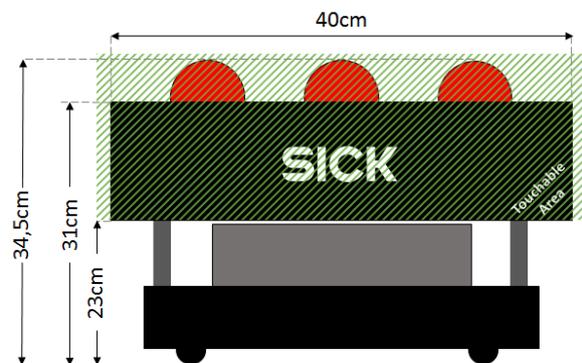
Dimensions of the transporter. All measurements have a tolerance of $\pm 2\text{cm}$
